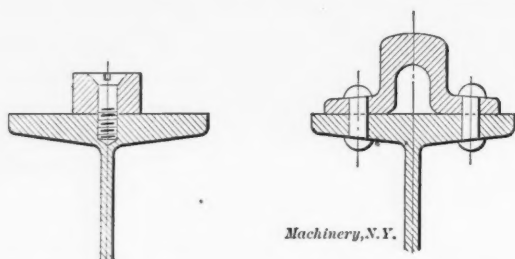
Methods of Attaching the Rail to the Beam Girder
